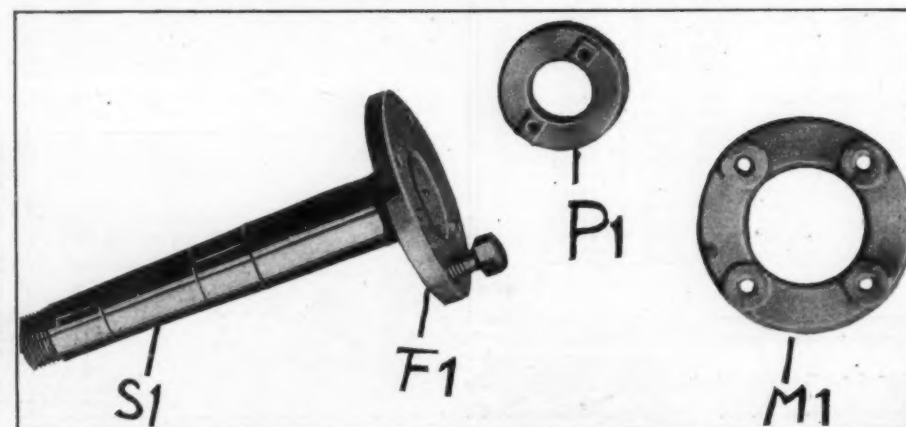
A very nice detail of the universal magneto drive in the Model M Thomas motor
